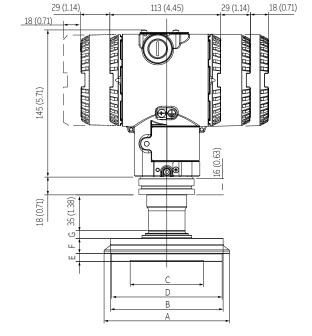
266HRH / 266NRH with barrel housing and direct mount seal S26SS Cherry Burrell (For dimensions of S26 seals refer to the S26 datasheet)
